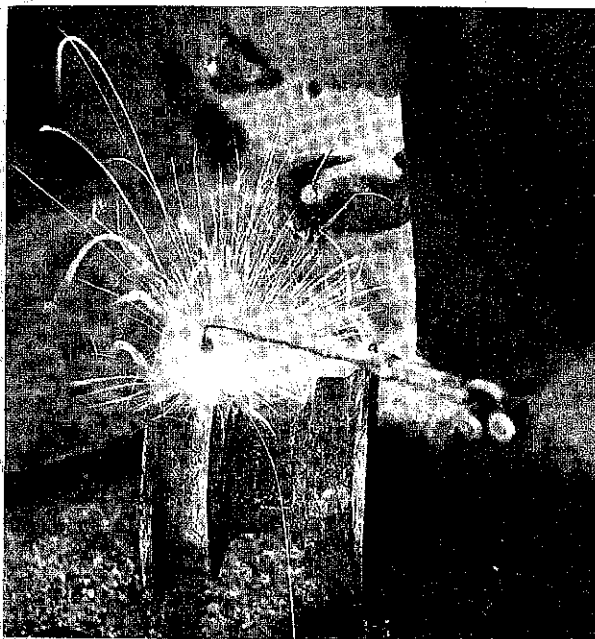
WELDING $\frac{3}{4}$ " BAR IN POSITION ON DIESEL CATERPILLAR 50 TRACK ROLLER.
